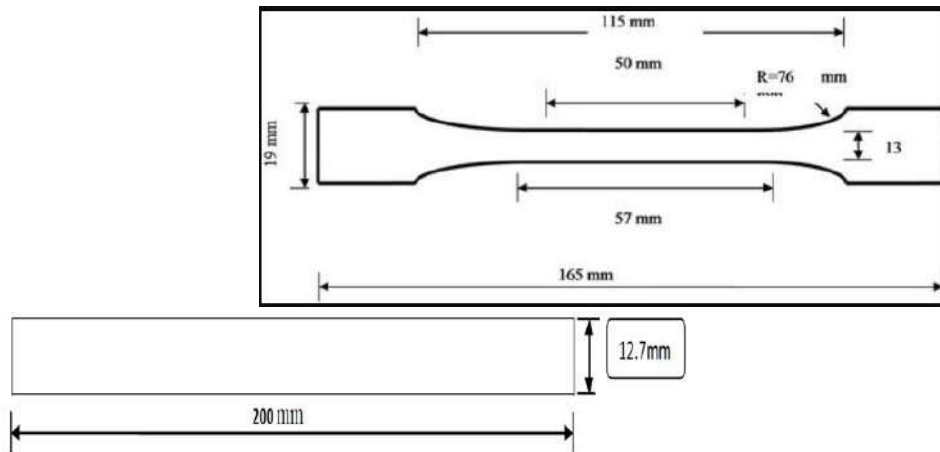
Specimen geometries for a) Tensile test, b) Three point bending test.
